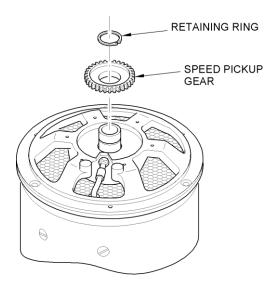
Installing Speed Pickup Gear and Retaining Ring onto Armature Shaft (Non-Preload)
